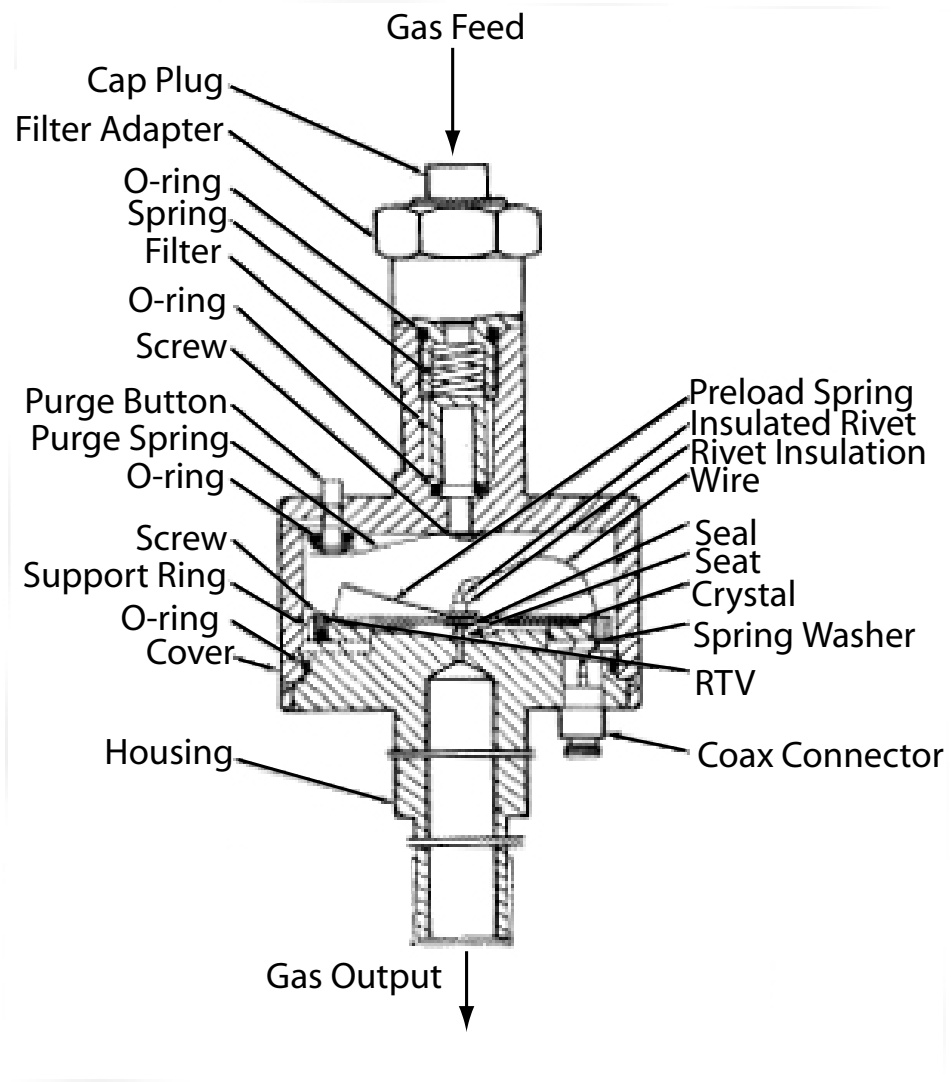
Cutaway of the Veeco PV-10 puff valve
